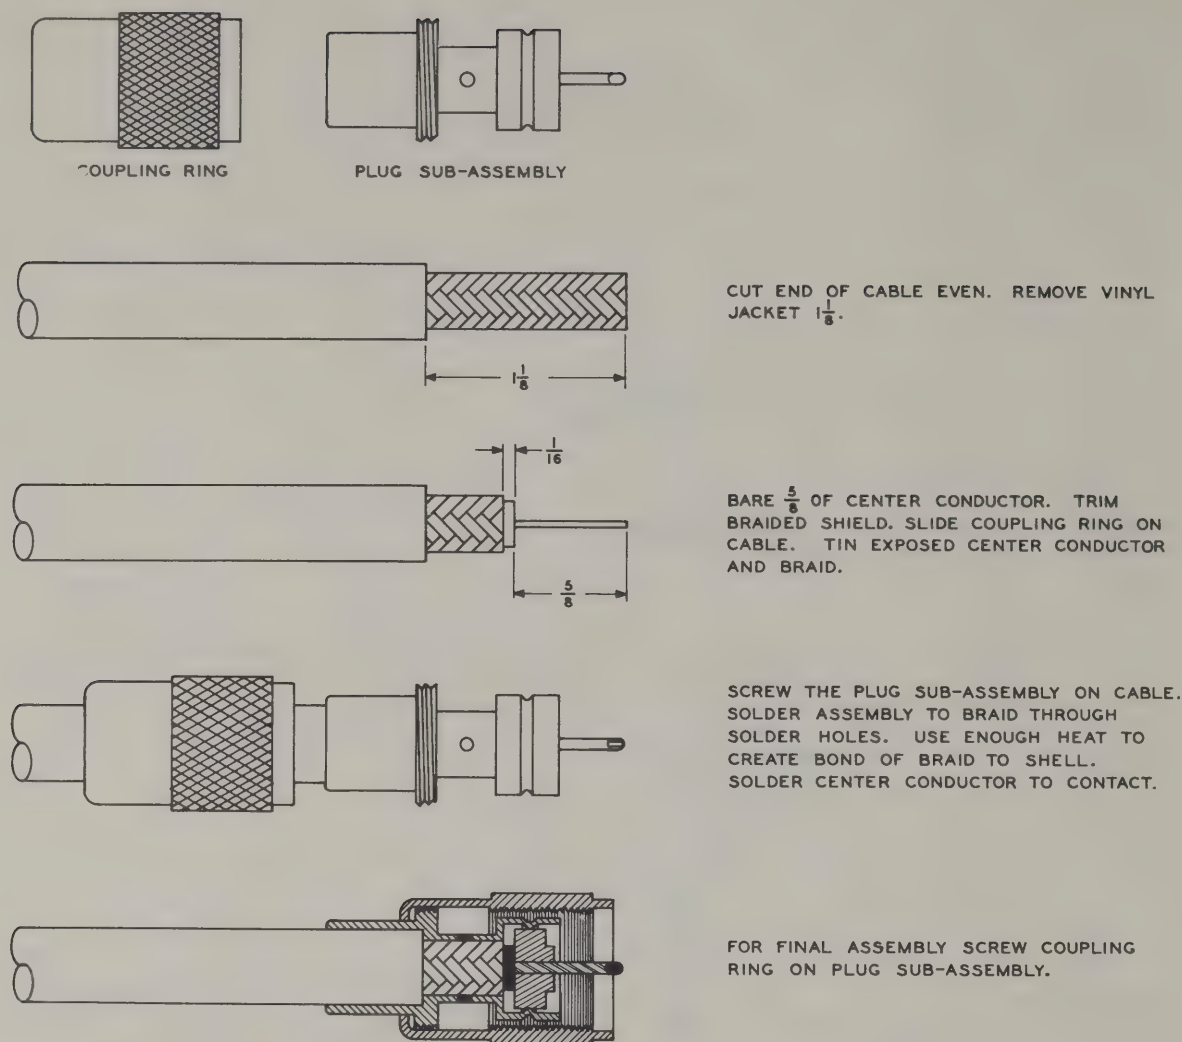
Assembly of Navy 49195 Connector to Coaxial Cable RG-8/U
